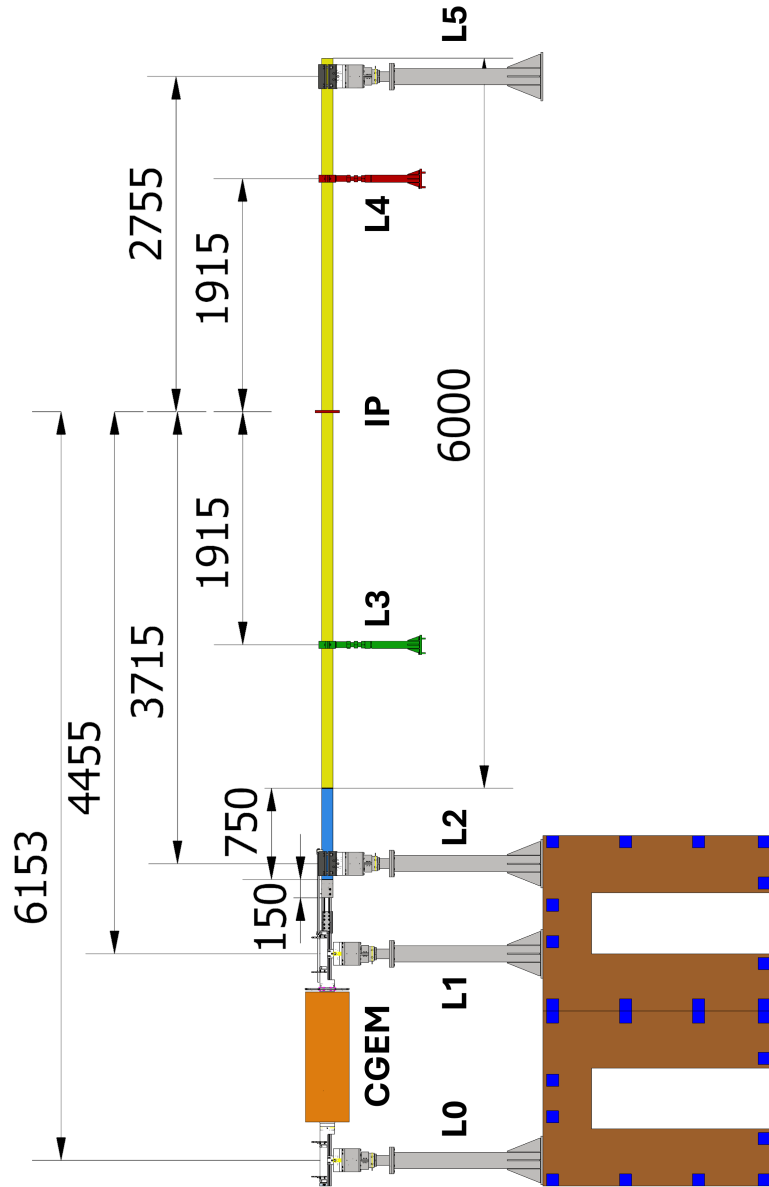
Layout of the insertion equipment in the BESIII experiment hall. All dimensions are in millimeters.
